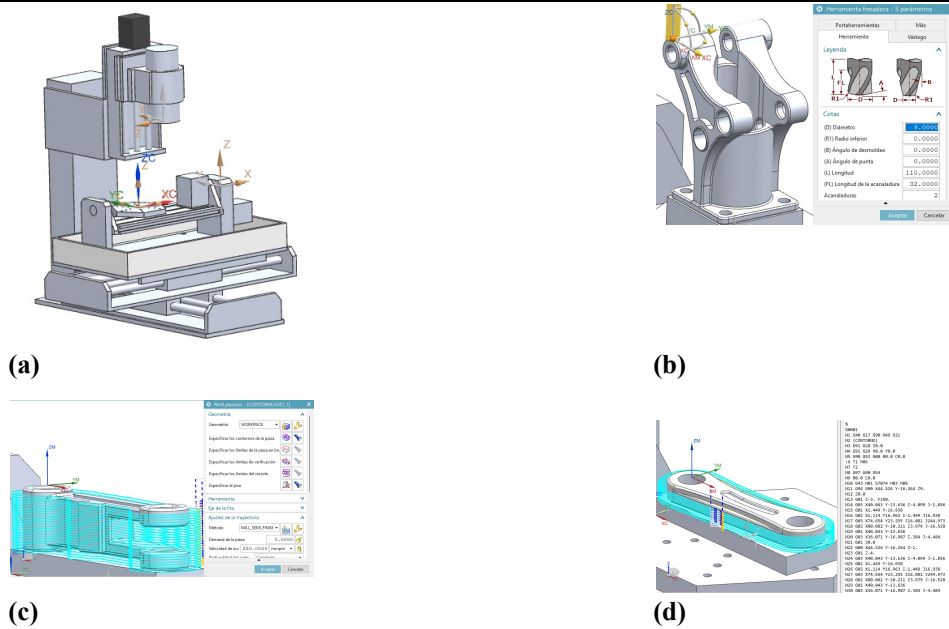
Virtual configurations and simulations of some elements prior to machining on the HY 3040 machine: (a) CAD model of the HY 3040 5-axis CNC machine; (b) Creation and configuration of tools for machining the lower link; (c) Trajectory simulation for the drive link; (d) Virtual simulation and generation of codes for the front links.
